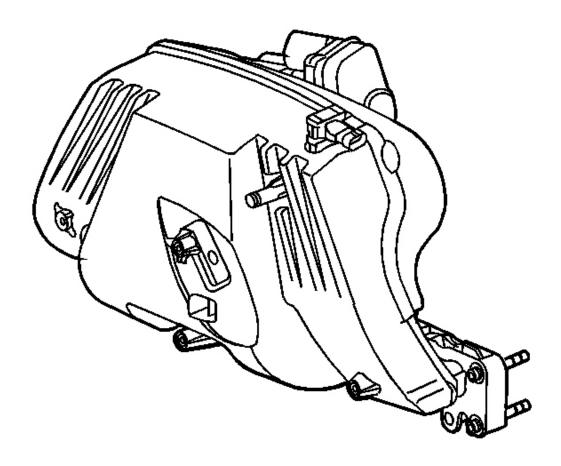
Inspecting Intake Manifold Courtesy of GENERAL MOTORS CORP.
